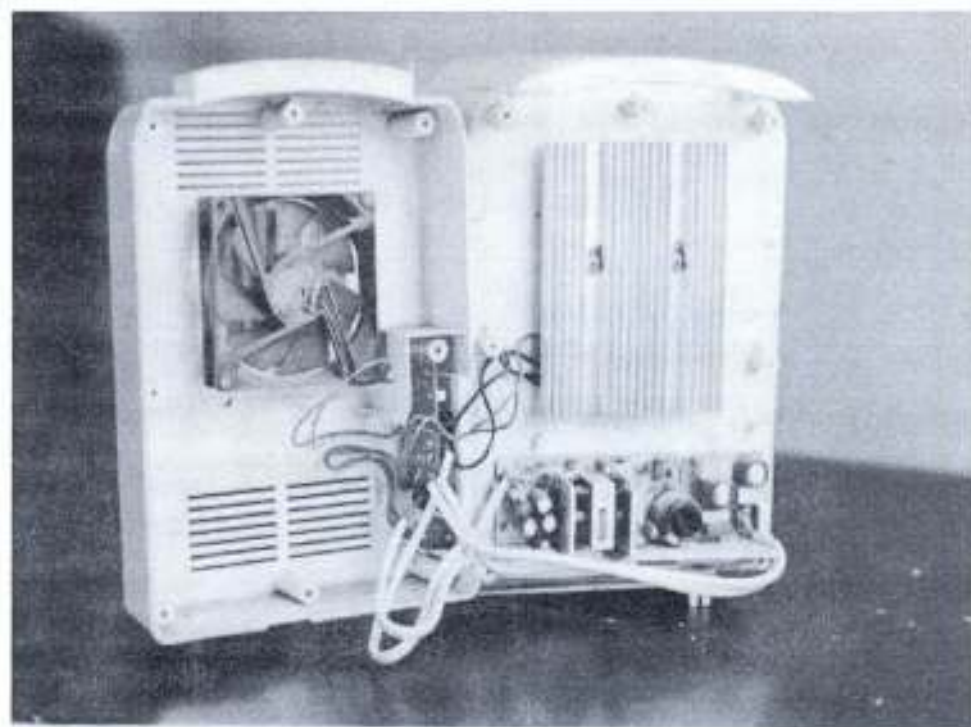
Assembly of the hot heat exchanger, electrical panel and the fan
